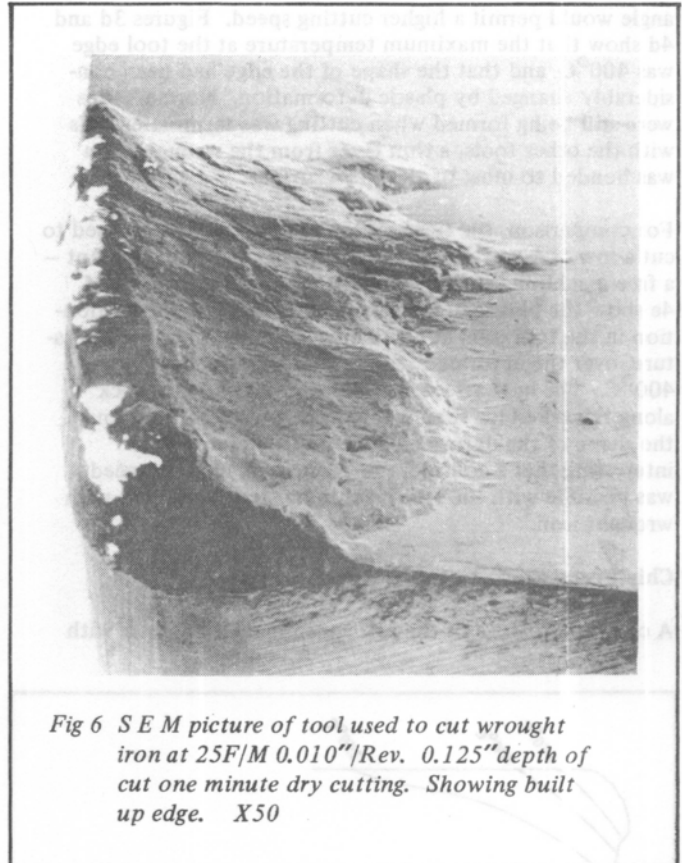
SEM picture of tool used to cut wrought iron at 25F/M 0.010"/Rev. 0.125" depth of cut one minute dry cutting. Showing built up edge. X50
